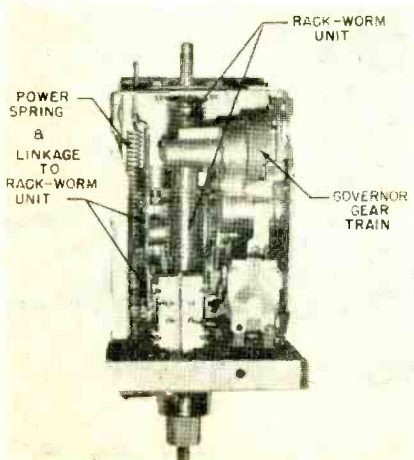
Mechanical assembly used in the wonder bar tuner.
